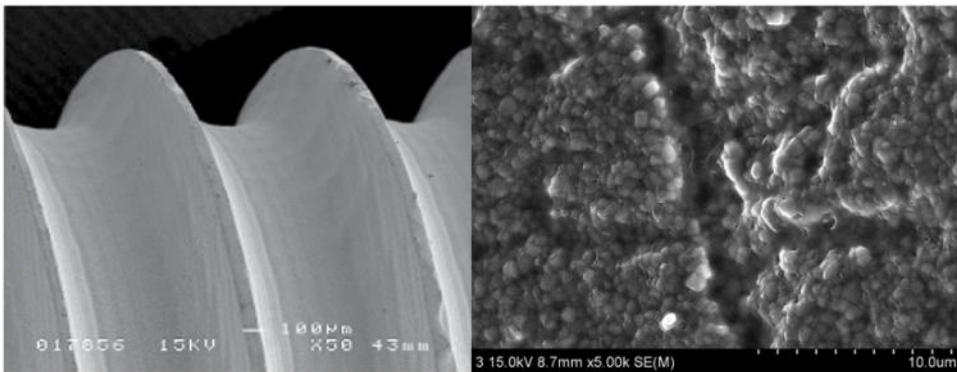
Surface defects of dental zirconia implant fabricated by CAD/CAM process [59].
